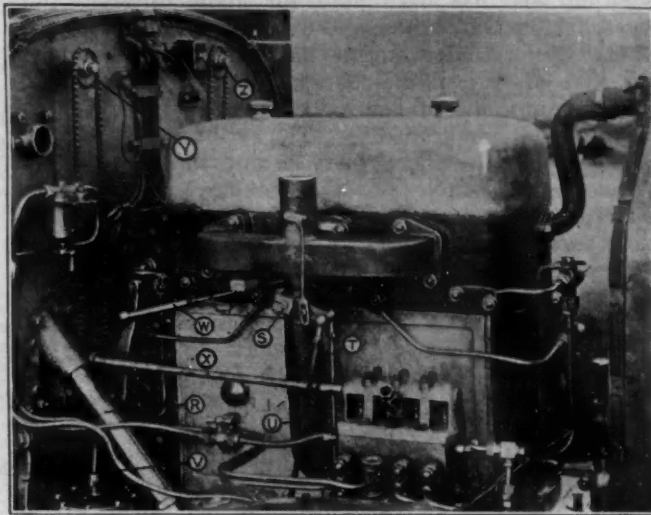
FOUR-CYLINDER DIESEL ENGINE INSTALLED IN A MOTOR-TRUCK
